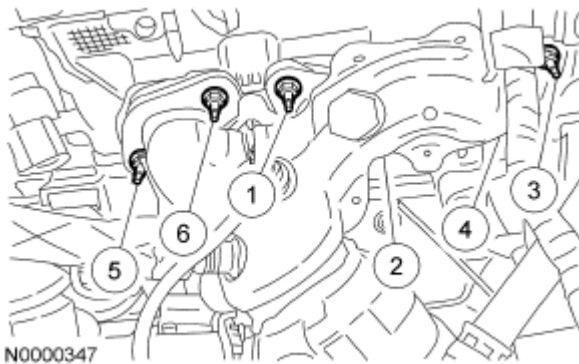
Identifying Tightening Sequence Of Exhaust Manifold
